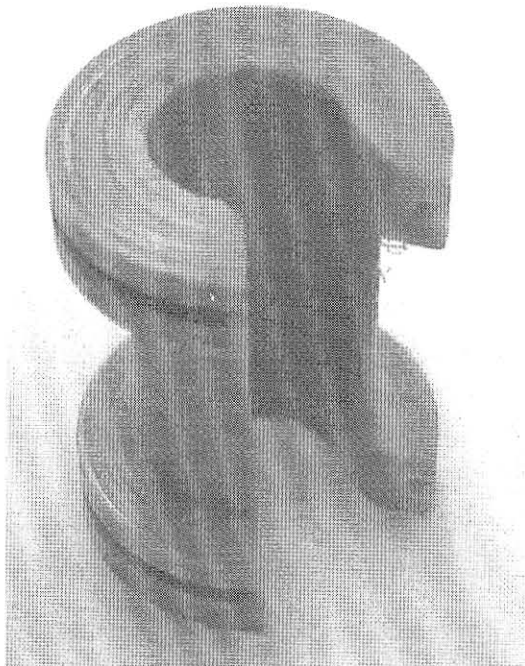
The one piece housing manufactured from PEEK and with a large side opening to accommodate the spherical bearings of the Medtronic Sofamor Danek Atlas Cable System.
